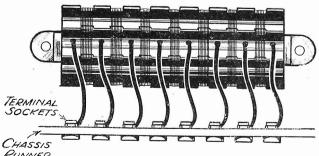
Showing how the potential divider is mounted on the underside of the chassis and flexible leads taken from the tappings to terminal sockets mounted on the chassis runner.
